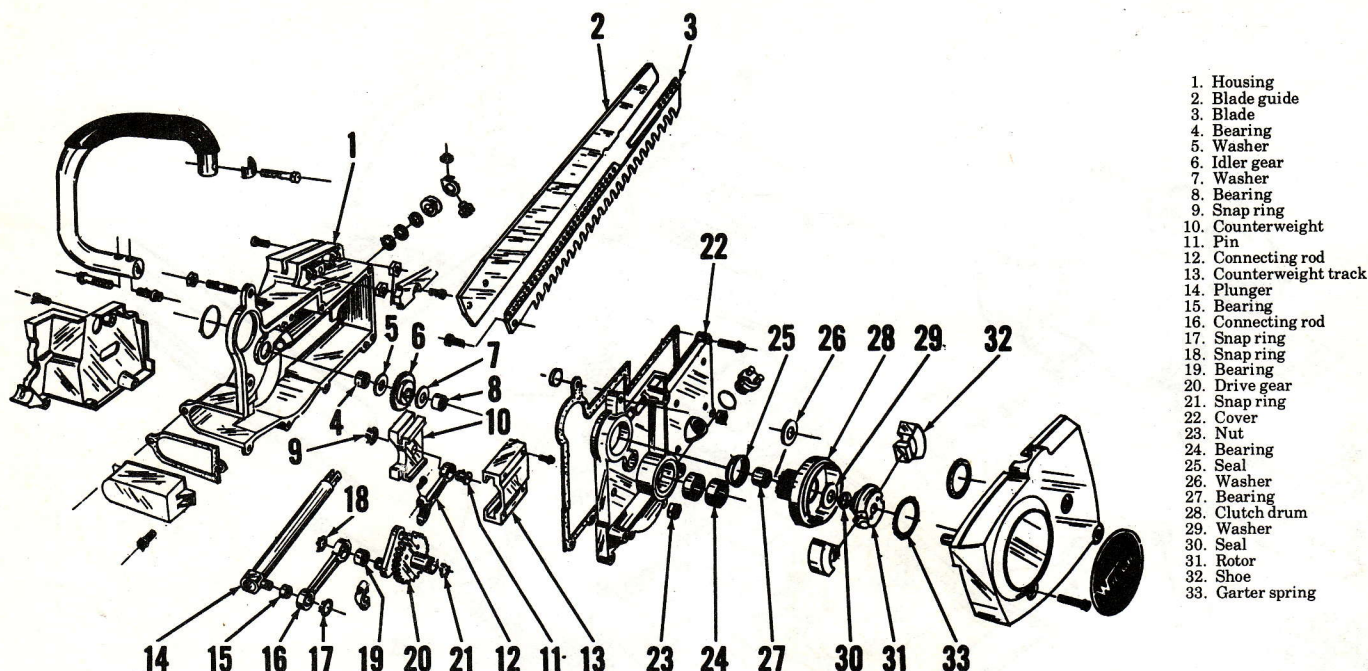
View showing blade drive assembly on model 100 saw. Power is transmitted through clutch assembly, idler gear (6) and drive gear (20). Circular motion is converted to reciprocating motion at drive gear and transmitted by connecting rod (16) and plunger (14) to blade (3). Connecting rod (12) and counterweight (10) are used to balance movement.
